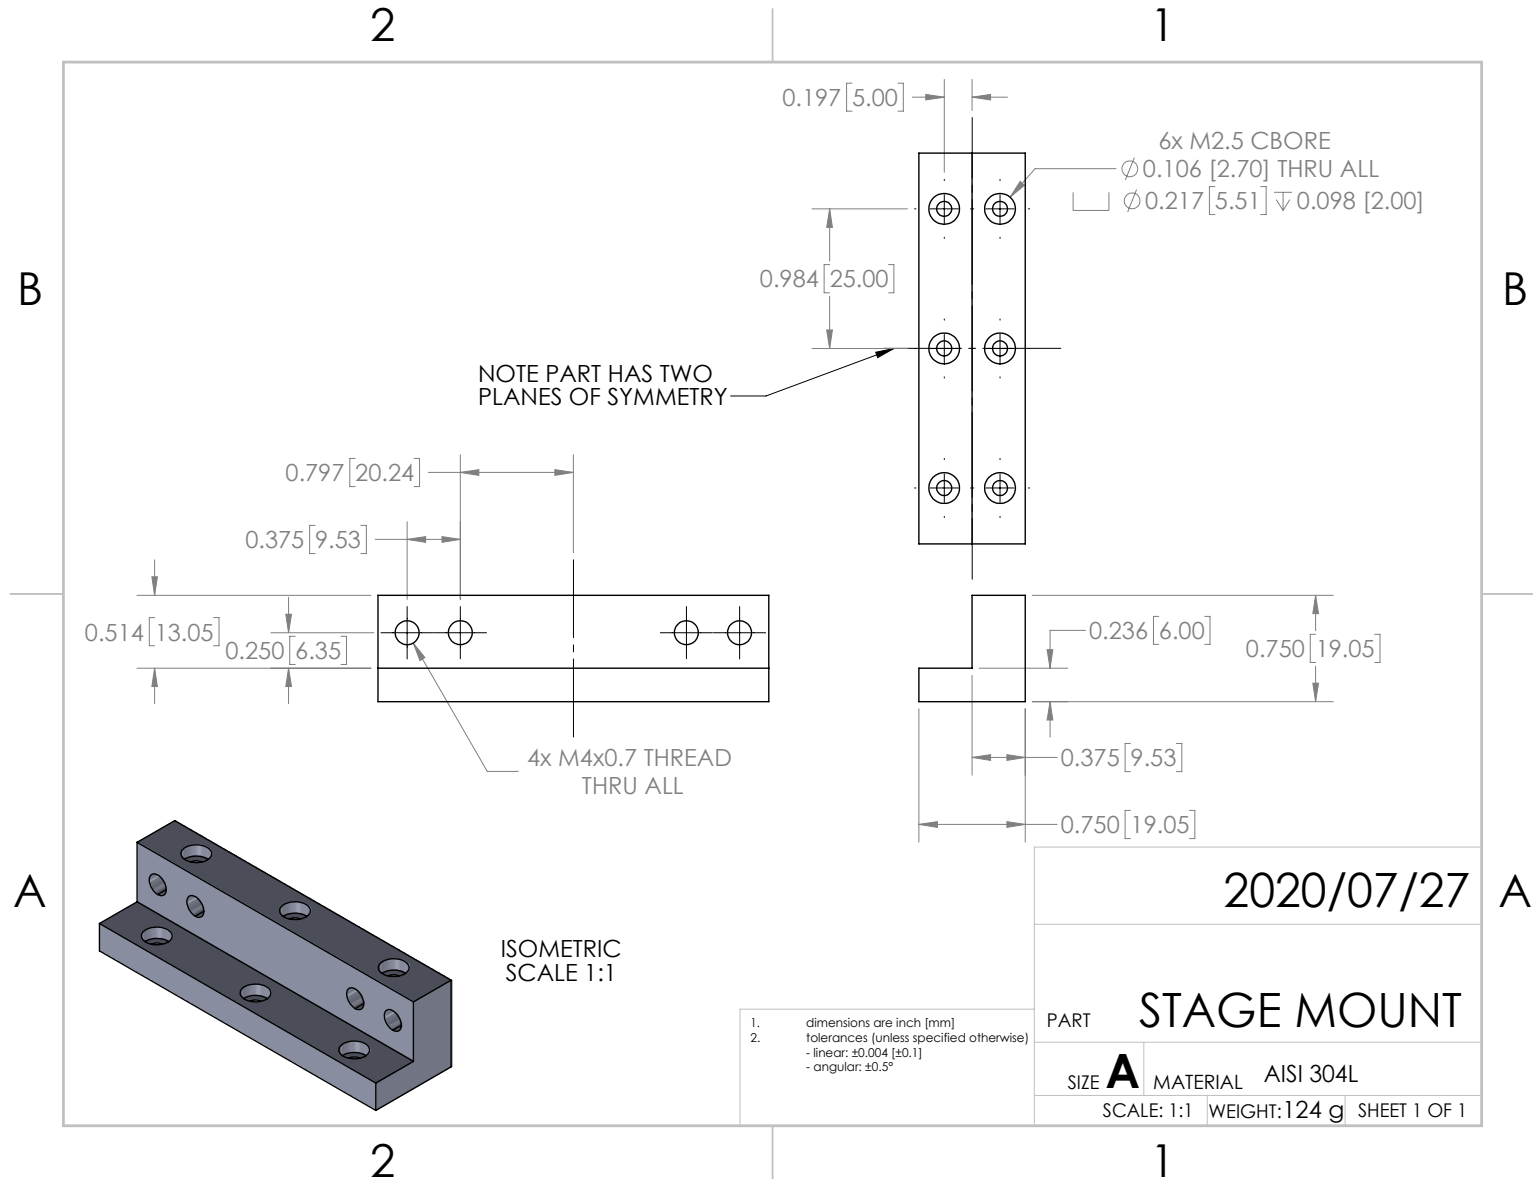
Mounting fixture for bolting the upper glue fixture to the piezoactuator.
